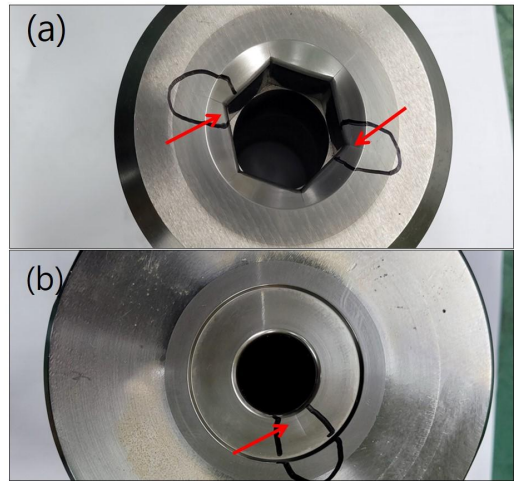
Pictures of fractured #4 punch (a) and die (b)
